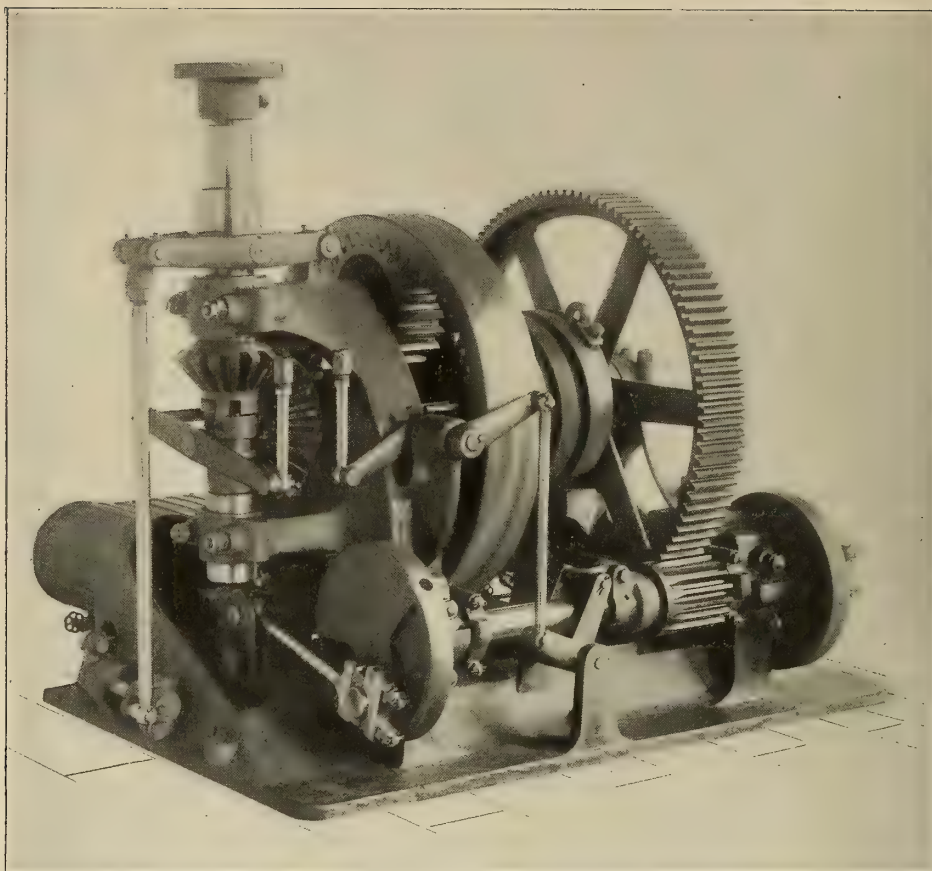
STEAM STEERING ENGINE BUILT BY THE GLOBE IRON WORKS CO., CLEVELAND, OHIO.
